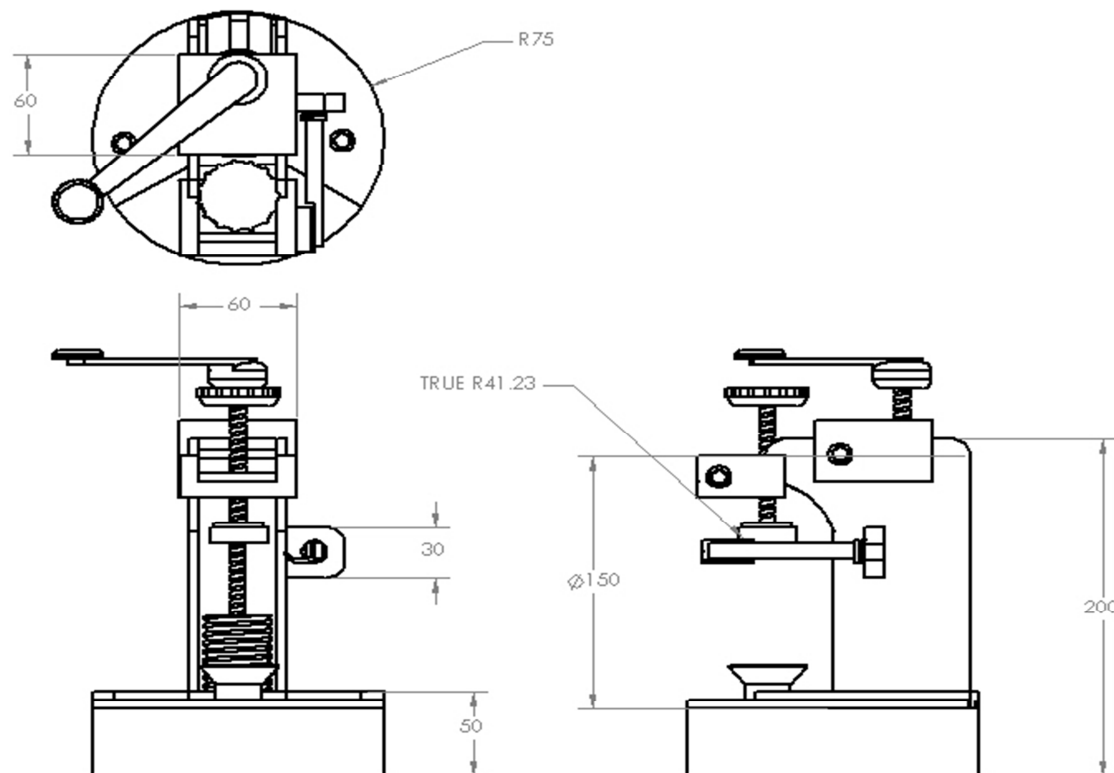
First angle orthographic projection views of device showing dimensions (in mm).
